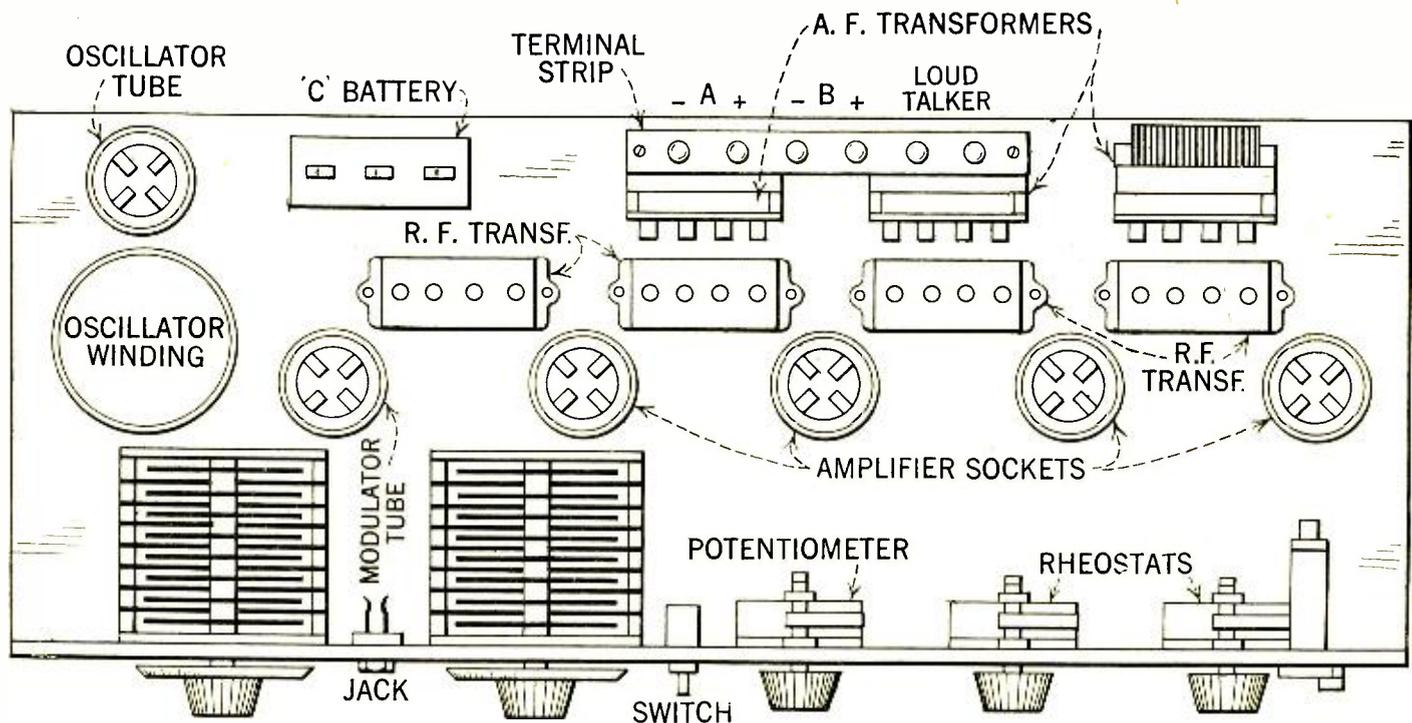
, assembly plan of Benson's Super-Heterodyne, with the parts designated.
